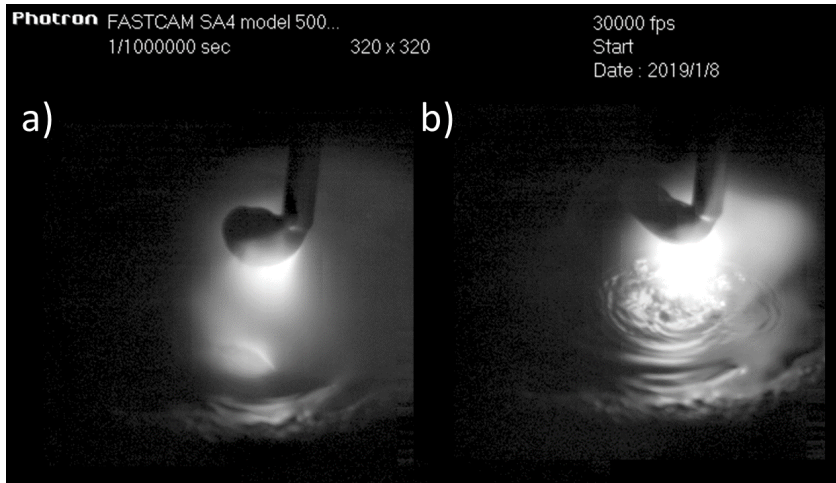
a) calm and smooth weld pool surface in the case with spot attachment, see Figure 19. b) rough weld pool surface at weld pool attachment. Shielding gas: helium, with $v_{weld} = 60 \left[\frac{cm}{min} \right]$. The arc is burning directly on the melt pool. Aperture 22; UV+ND4 Filter. 436nm spectral filter. 30000fps. $1/1000000[s]$ shutter time. [MOK20b]
